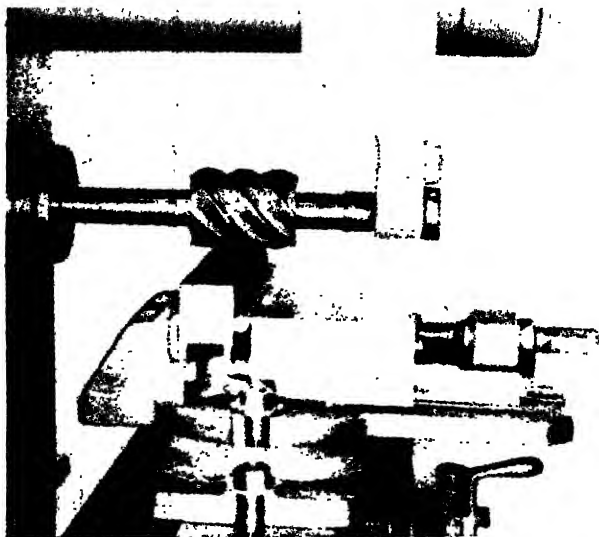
Cutting the second side of the rectangular block. (James Anderson)
